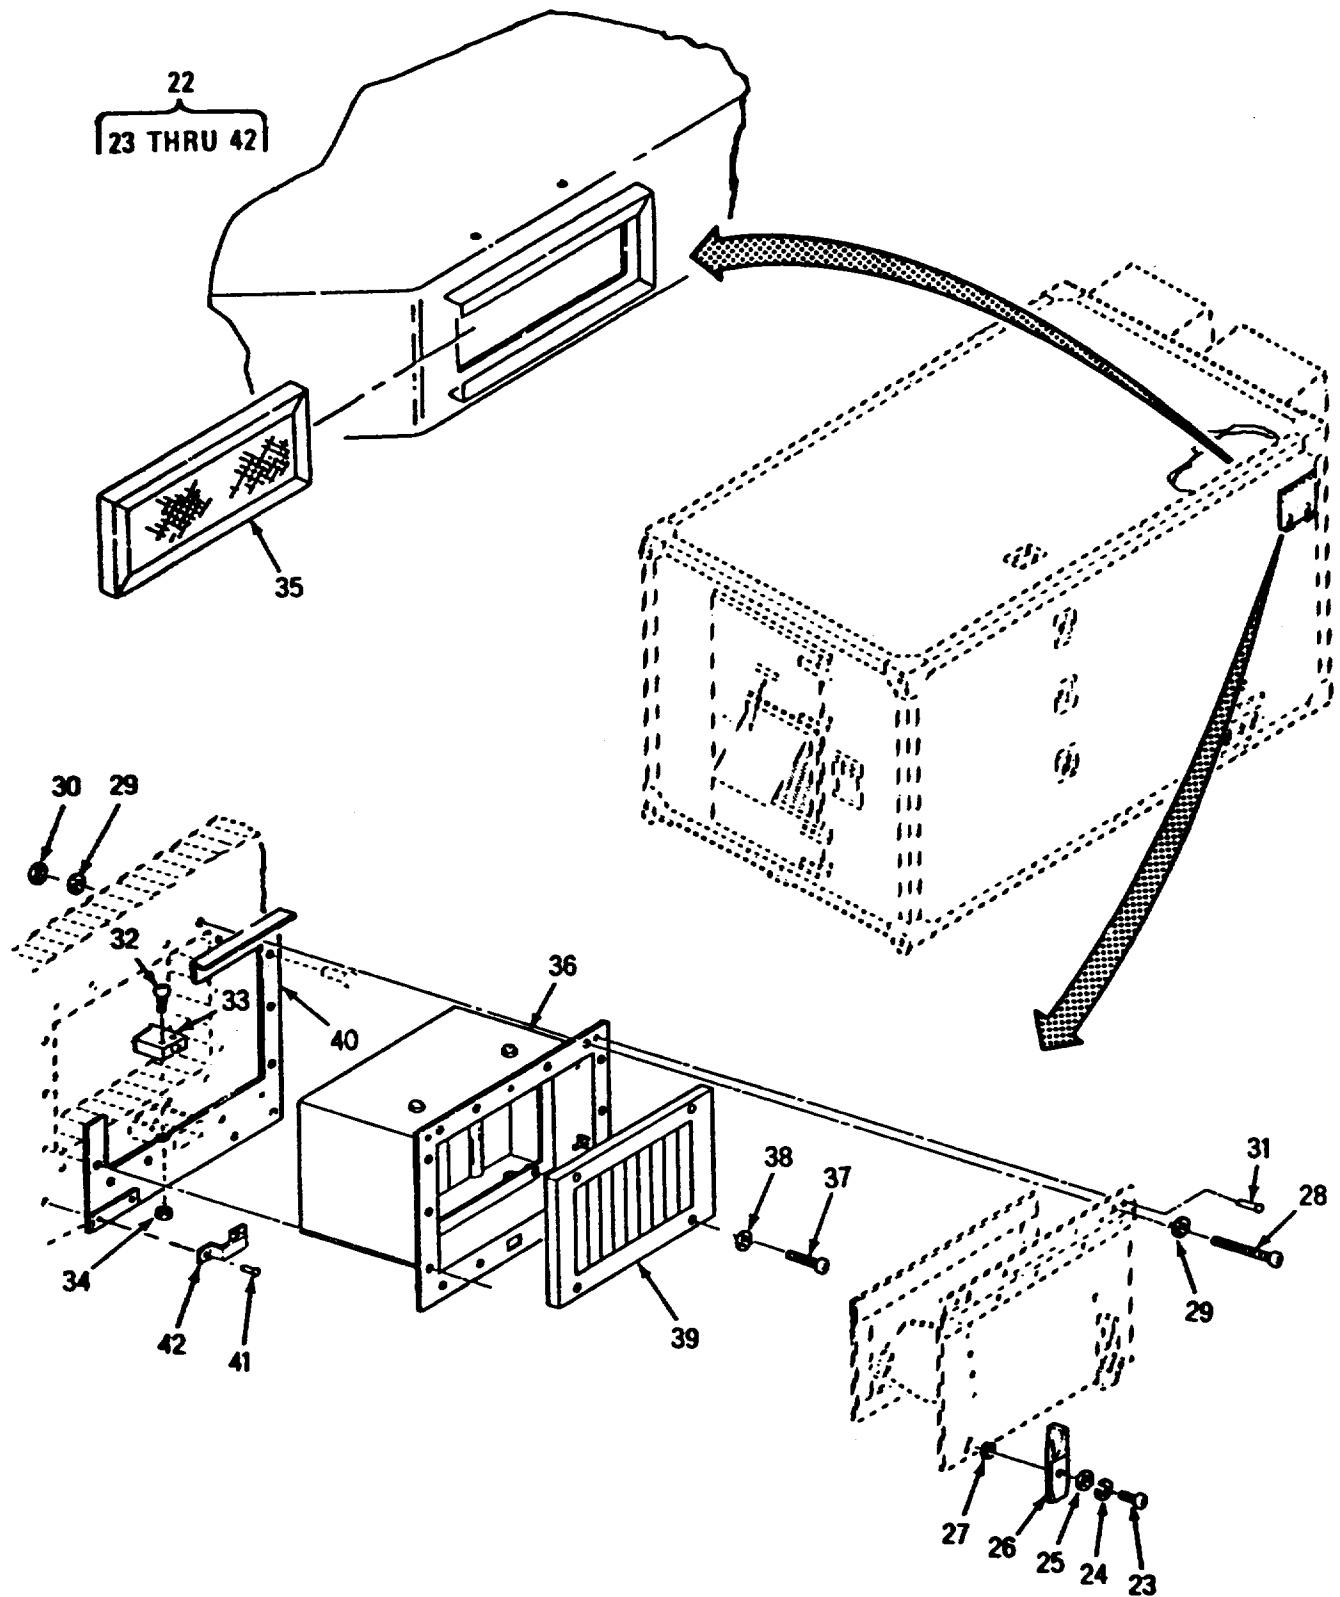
Purge System Port Doors and Limit Switches, Right Hand (Sheet 2 of 2)
